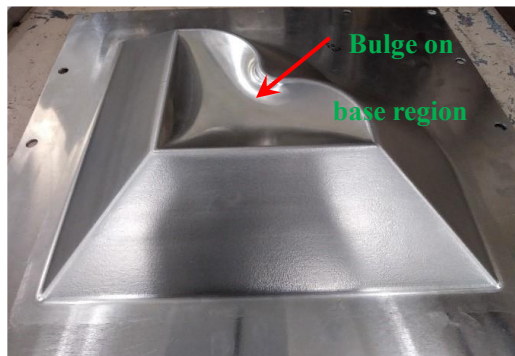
Heart shaped benchmark geometry with a geometric bulge defect. The sheet-die surface is shown
